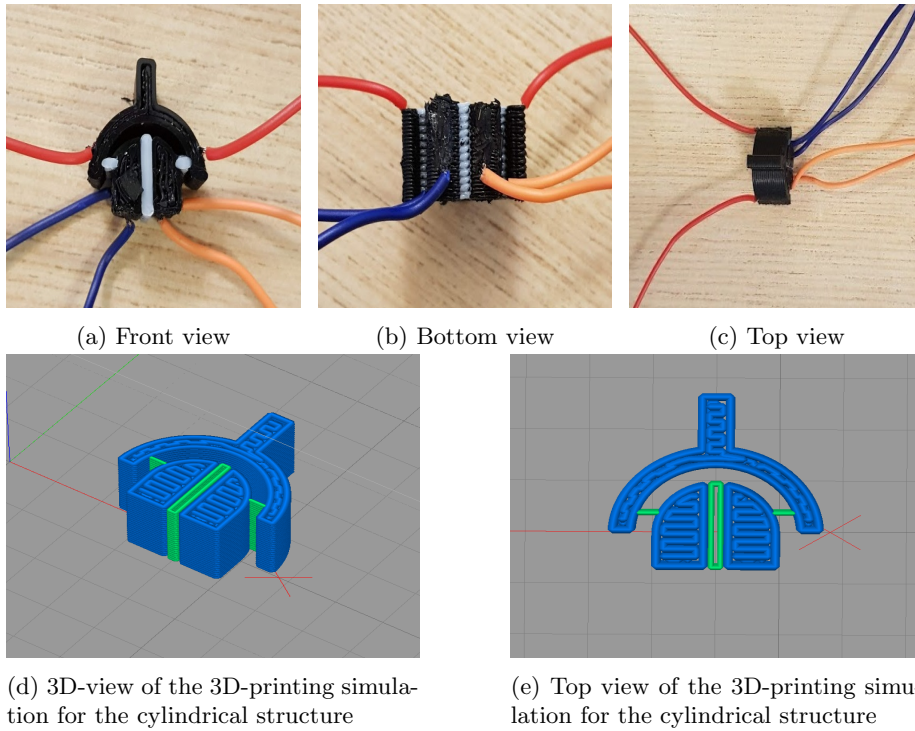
Front, bottom and top view of the final cylindrical structure print and the wires used for measurements
